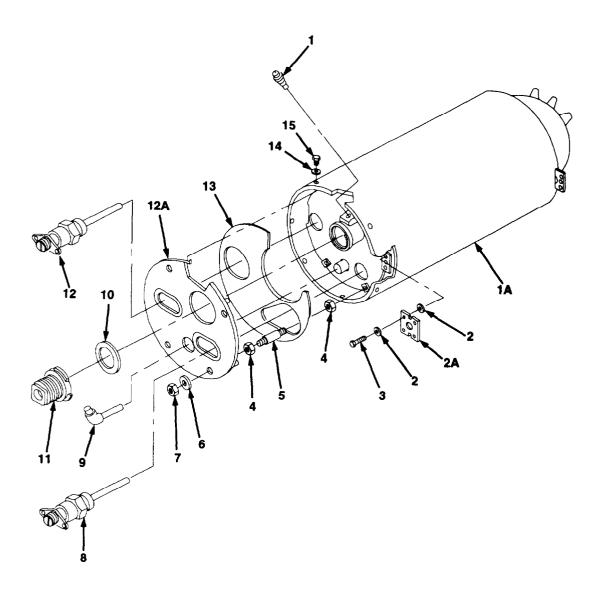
Pulse Jet Engine Assembly 31- 15-2342
